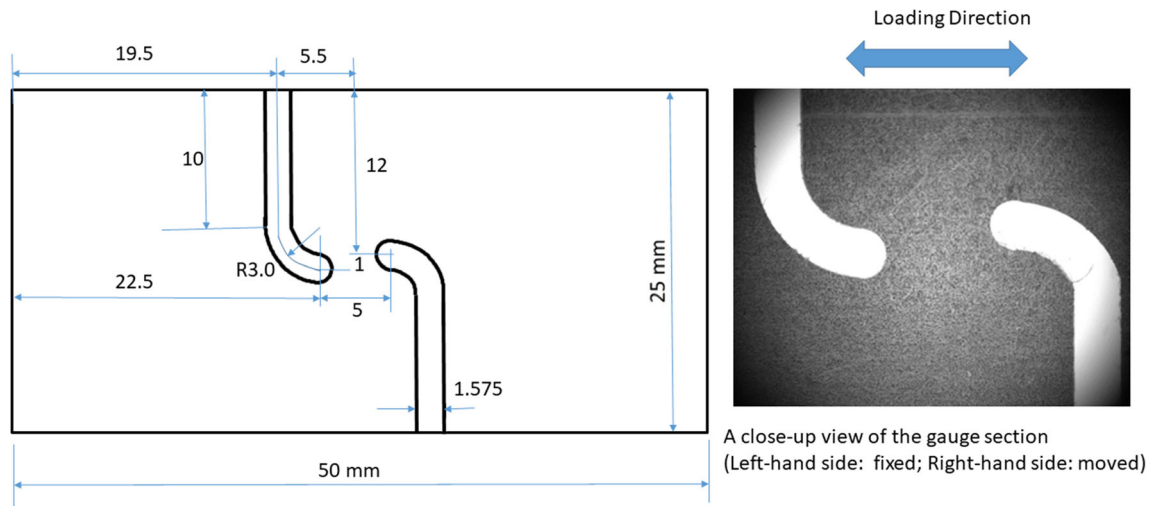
Dimensions of Type A shearing test coupon and a close-up view image of an as-machined AA6111-T4 sheet sample with a thickness of 1.2mm
